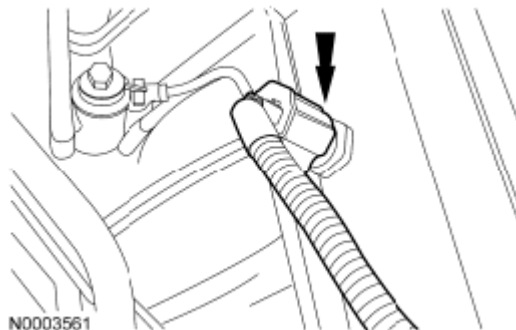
Locating Cylinder Head Temperature (CHT) Electrical Connector
